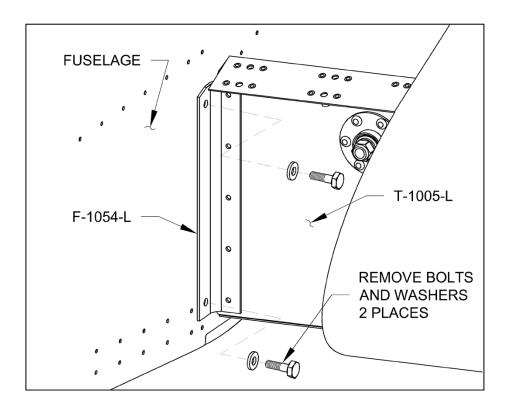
REMOVING THE TANK ATTACH ANGLE
